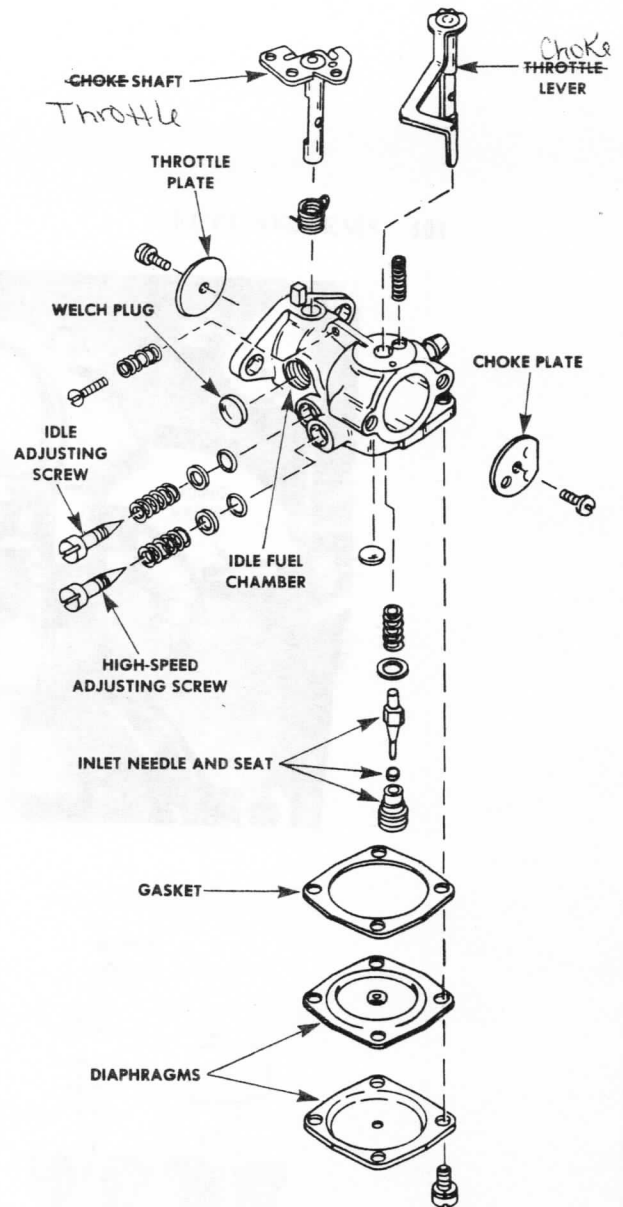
An exploded view of a diaphragm carburetor. (Tecumseh Products Co.)
